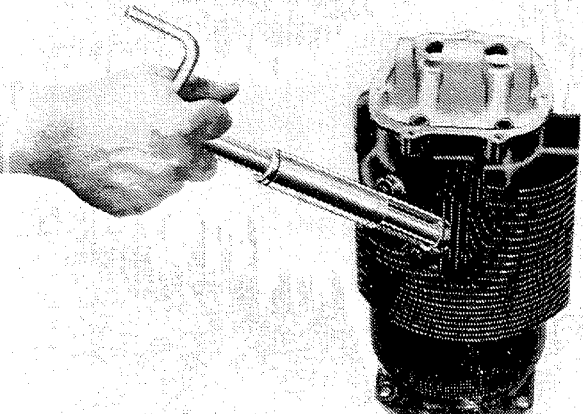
A. INSTALL SPARK PLUG HOLE HELICAL COIL INSERT
